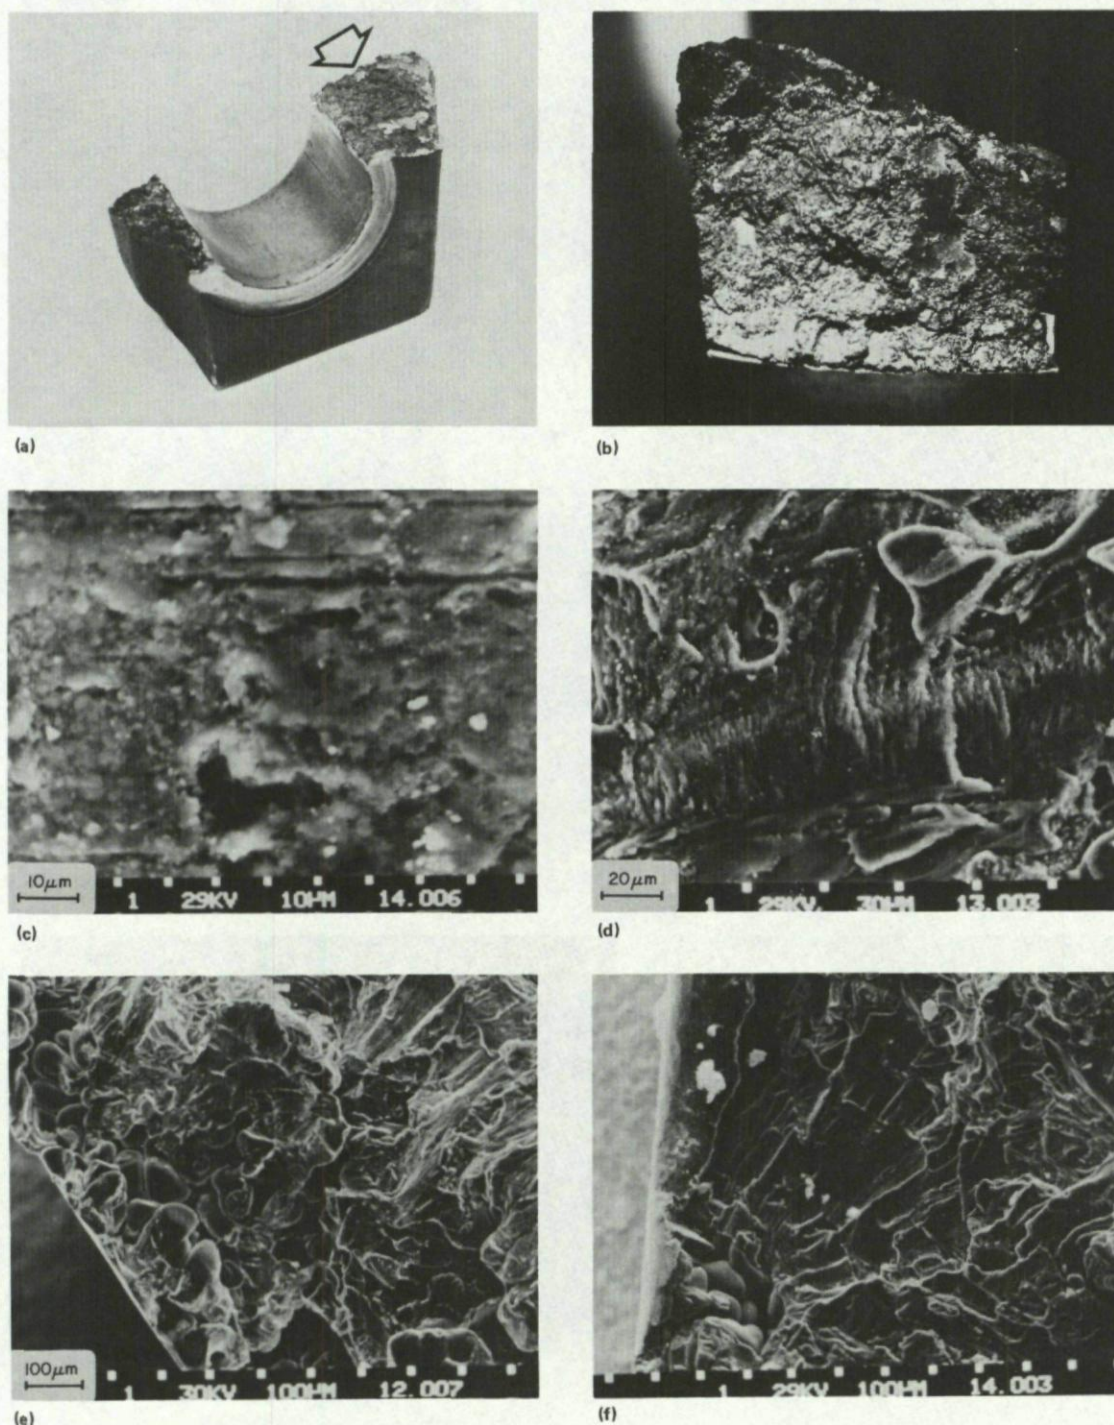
Corrosion fatigue of a cast aluminium rocker arm journal bearing
